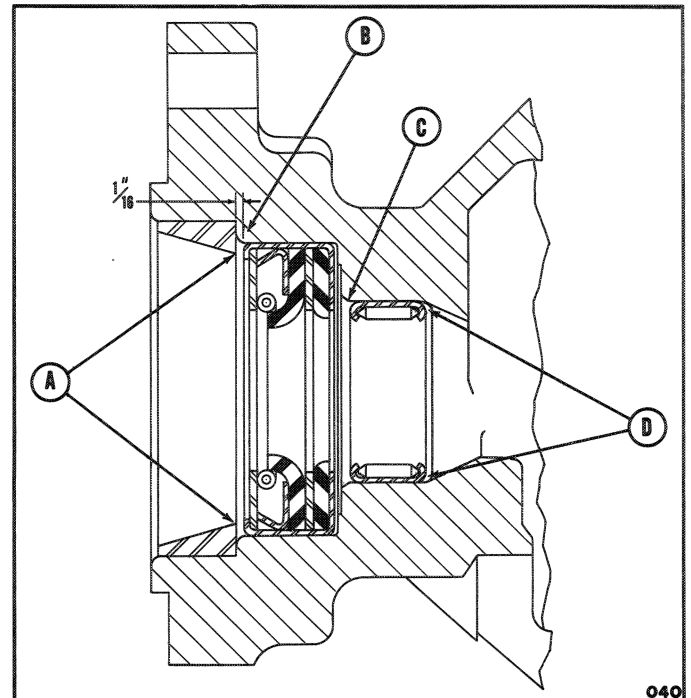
Bearing Cup, Seal and Needle Bearing Installation
